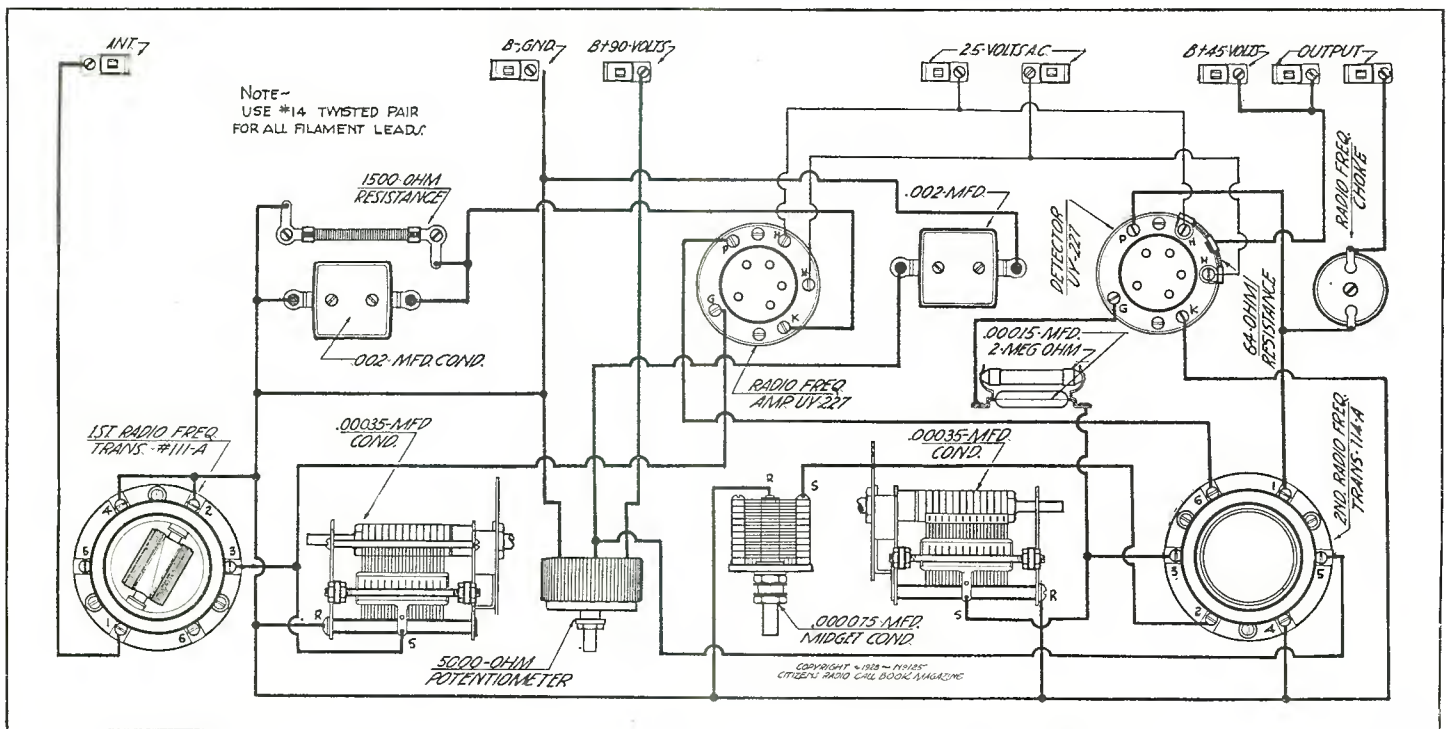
This graphic diagram shows the exact method of making connections for the Universal two tube tuner and should be followed by the builder in wiring up the receiver
